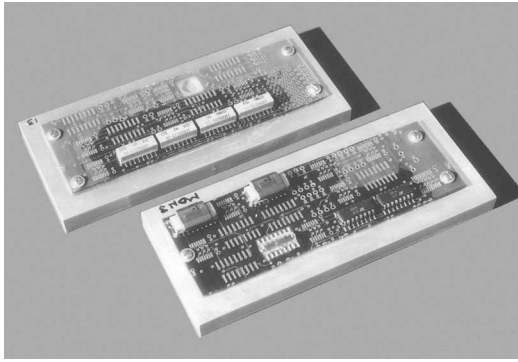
Mock-up printed wiring boards used for thermal-cycle testing
